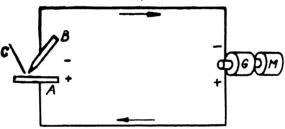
Carbon arc circuit: A. Work being welded, B. Carbon electrode, C. Filler metal, G. Generator, M. Motor
